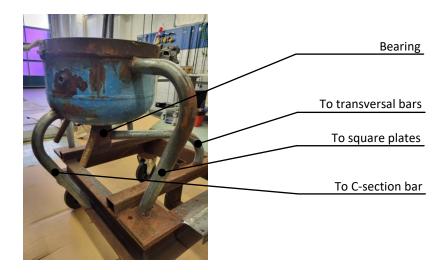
Collector welded to the structure. Source: author's own.
